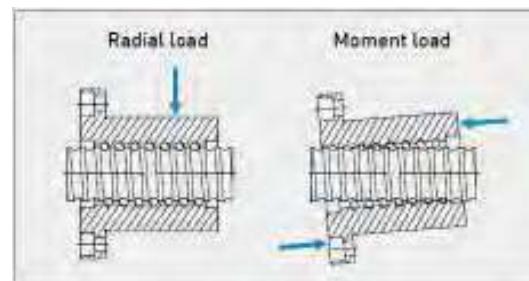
(a) Unbalance load caused by misalignment of the support bearings and nut brackets, inaccurate alignment of the guide surface, inaccurate angle or alignment of the nut mounting surface
